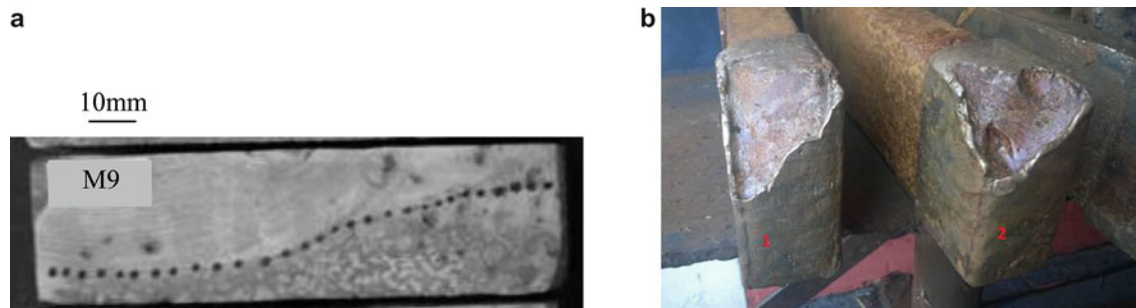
(a) Typical aspects of longitudinal section of bottom surface of the hammer head of the cast crusher produced; (b) general aspect of the wear suffered by a commercial product with surface coated by welding [10]
